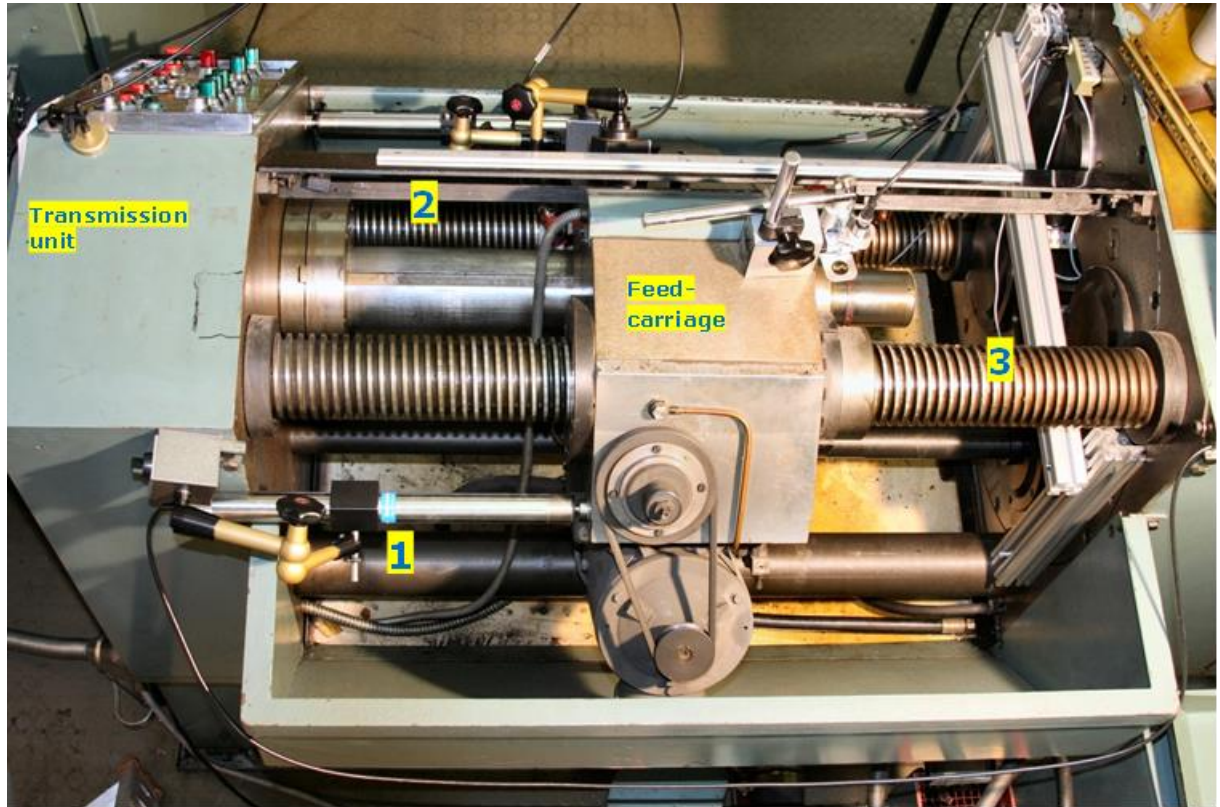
Machines top view / Three Massive Columns / Feed Carriage
